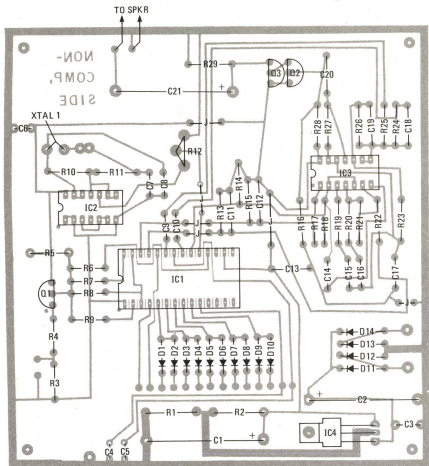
COMPONENT LAYOUT showing positions of all on-board parts. Switches, speaker and power transformer are mounted in the case.
